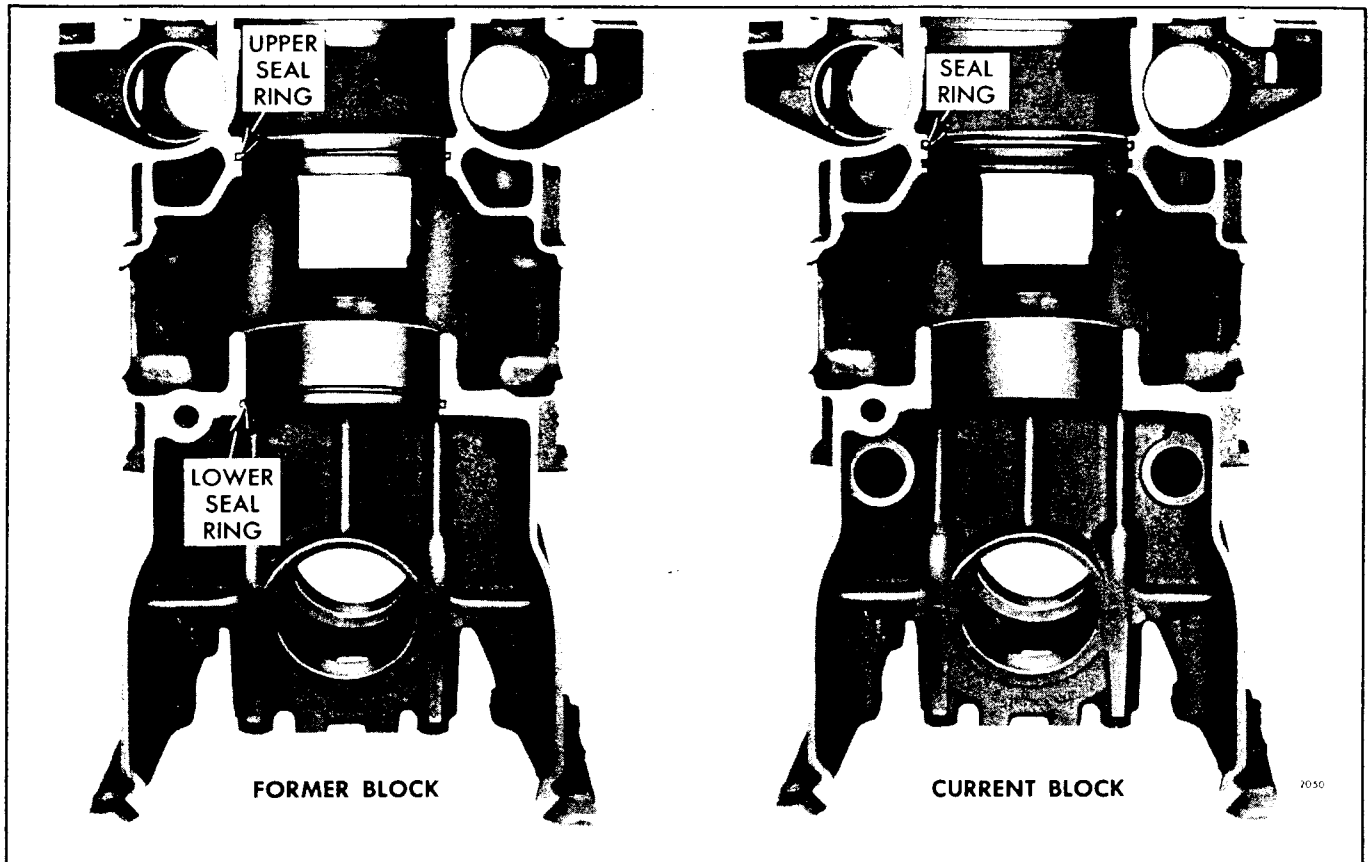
Cylinder Liner Seal Ring Locations in Cylinder Block Bores
